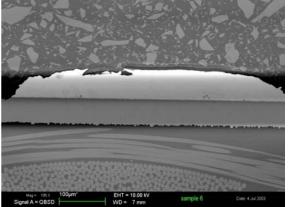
SEM Image of a X -Section (195x mag.) of a SMD BGA Pad after Ball Shear Testing on an 11.2% P Nickel Layer - Fracture within the Solder
